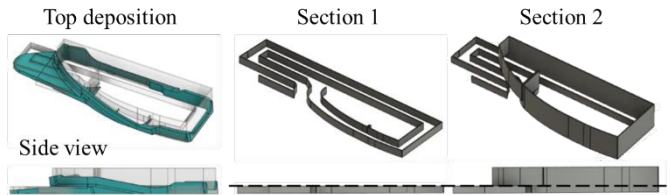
Part top deposition; the lower section 1 containing localized, solid geometry and appropriate overlaps and the upper section 2 containing remaining outer part contours are also shown.
